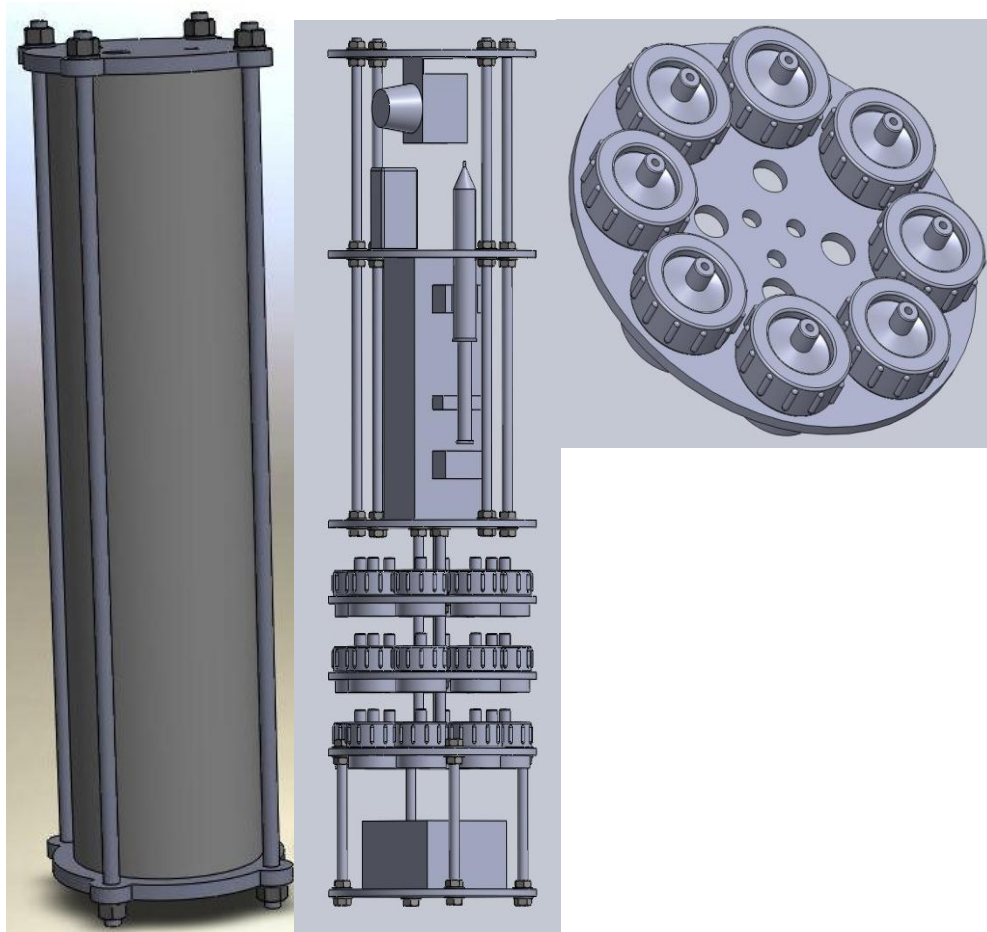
CAD drawing of the prototype SaFA system. A. External pressure vessel and internal chassis design. B. View of the filter holding plate.
